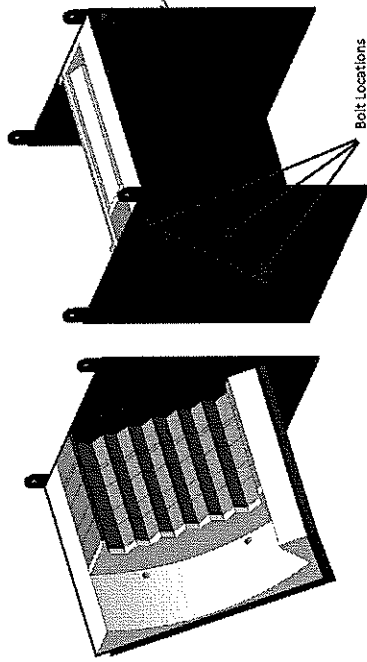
RENDER OF THE PSR MOLD FRAME AND OUTSIDE PLATE ORIENTED TO BEGIN MOLD ASSEMBLY.
